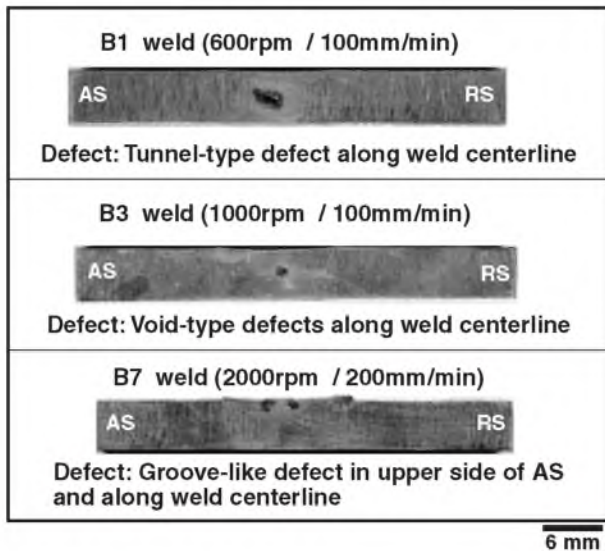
Appearance of cross-sections of typical B-welds.
